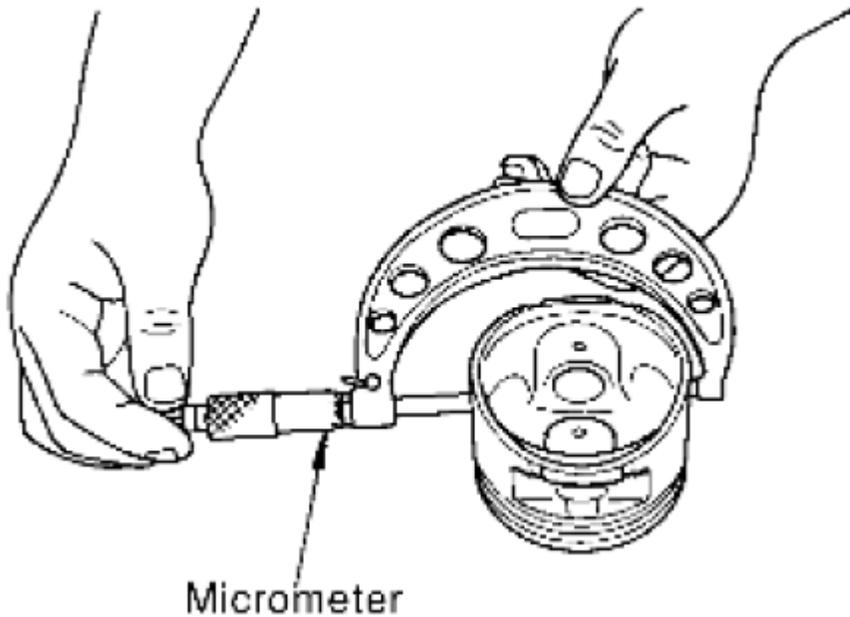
Measuring Outer Diameter Of Piston Skirt
